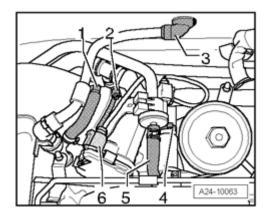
Disconnecting Throttle Valve Control Module J338 Electrical Harness Connector Courtesy of VOLKSWAGEN UNITED STATES, INC.
